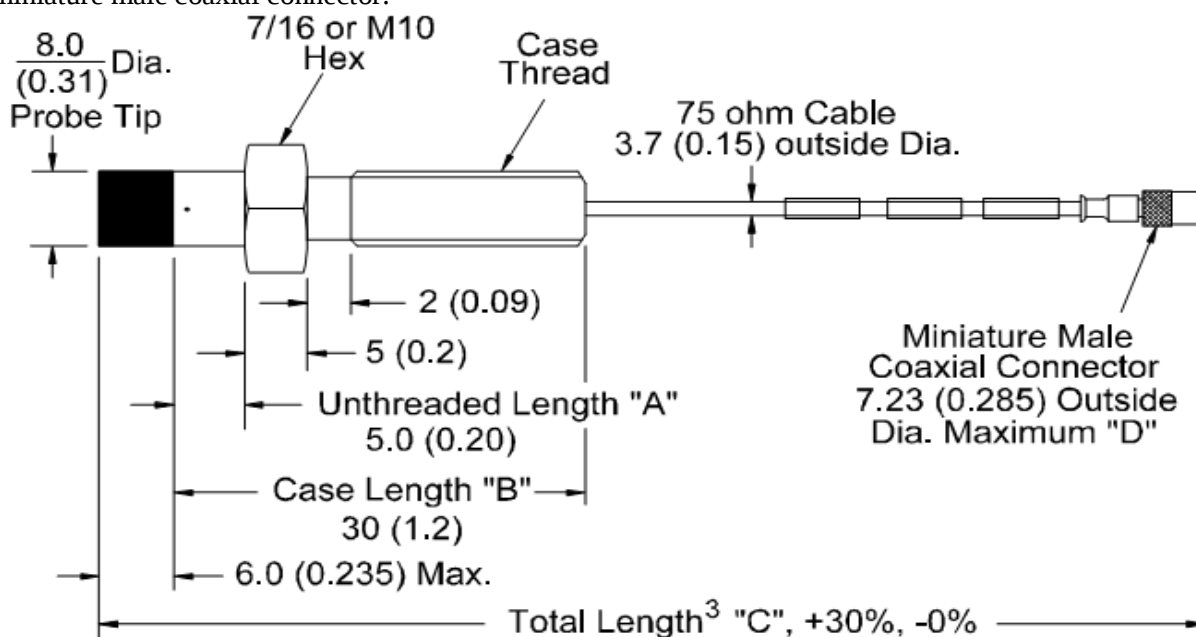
a: 8 MM REVERSE MOUNT PROBE
